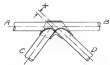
Diagram illustrating an eccentric moment in fitting attachment. Member D is eccentric by the distance X in the drawing.
